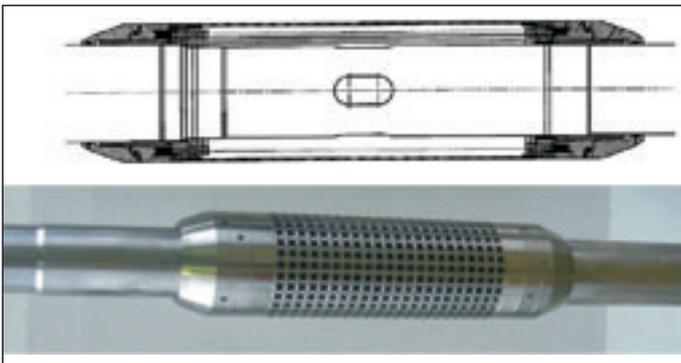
PetroCeram® Sleeve: Ceramic screen mounted on sliding sleeve, top: engineering drawing; bottom: picture of prototype assembly
